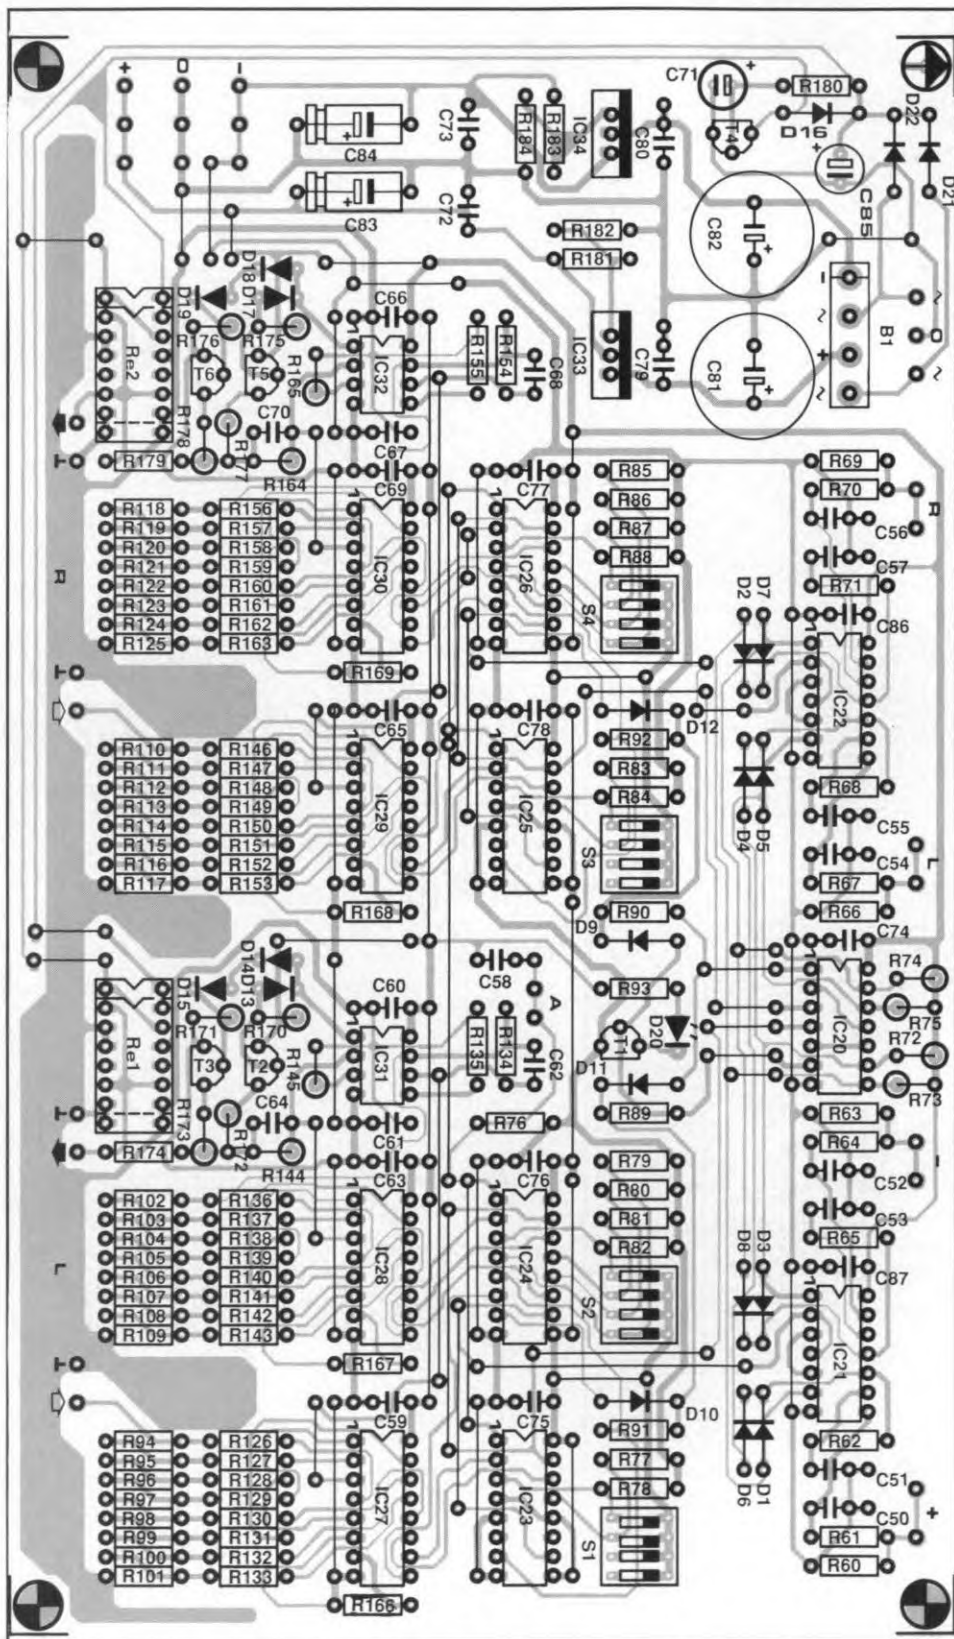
Component mounting side of the printed-circuit board for the volume and balance control.
